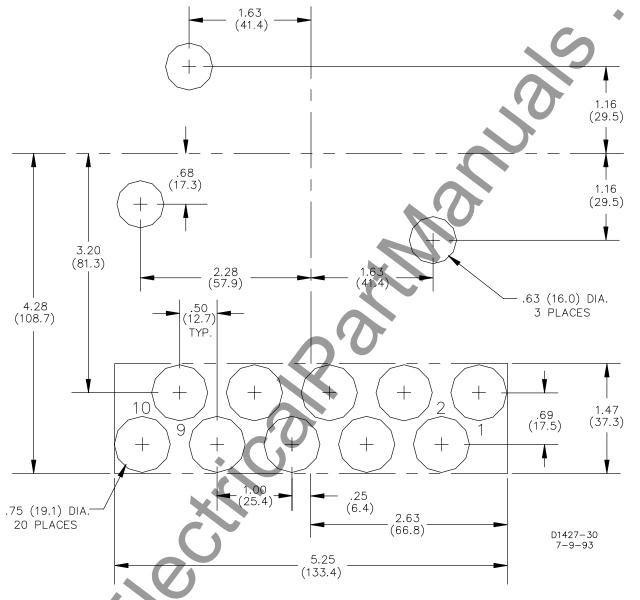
Panel Cutting/Drilling, Single-Ended Projection-Mount Case
